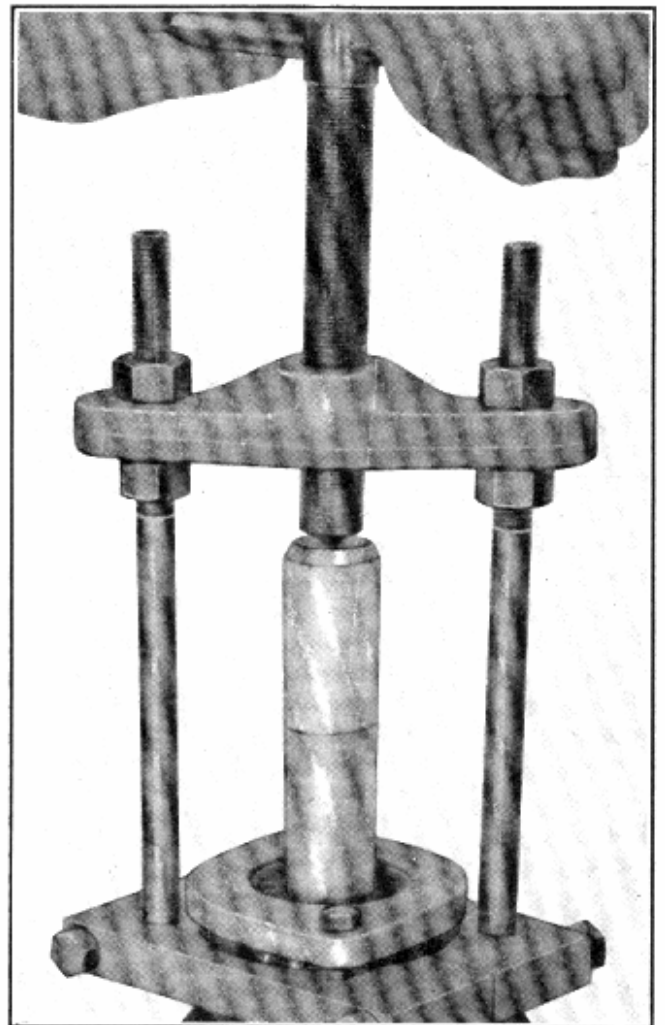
Removing Tapered Roller Bearings, Tool No. C.S.-1047
